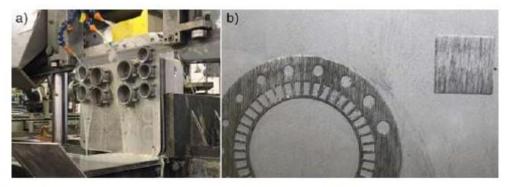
a) Band saw cutting parts from build plate. b) Build plate surface after parts removed.
